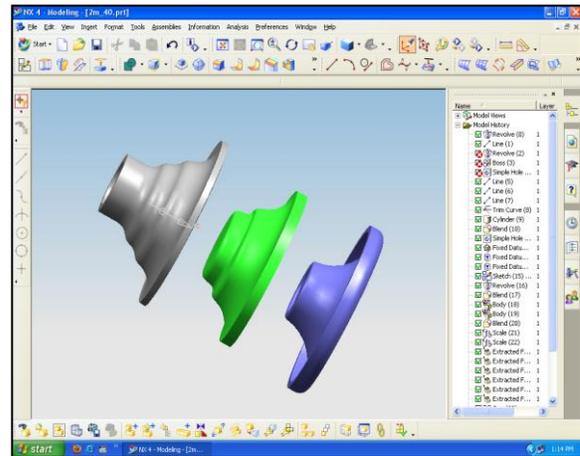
CAD Model of Upper Shell, Component and Lower Shell
